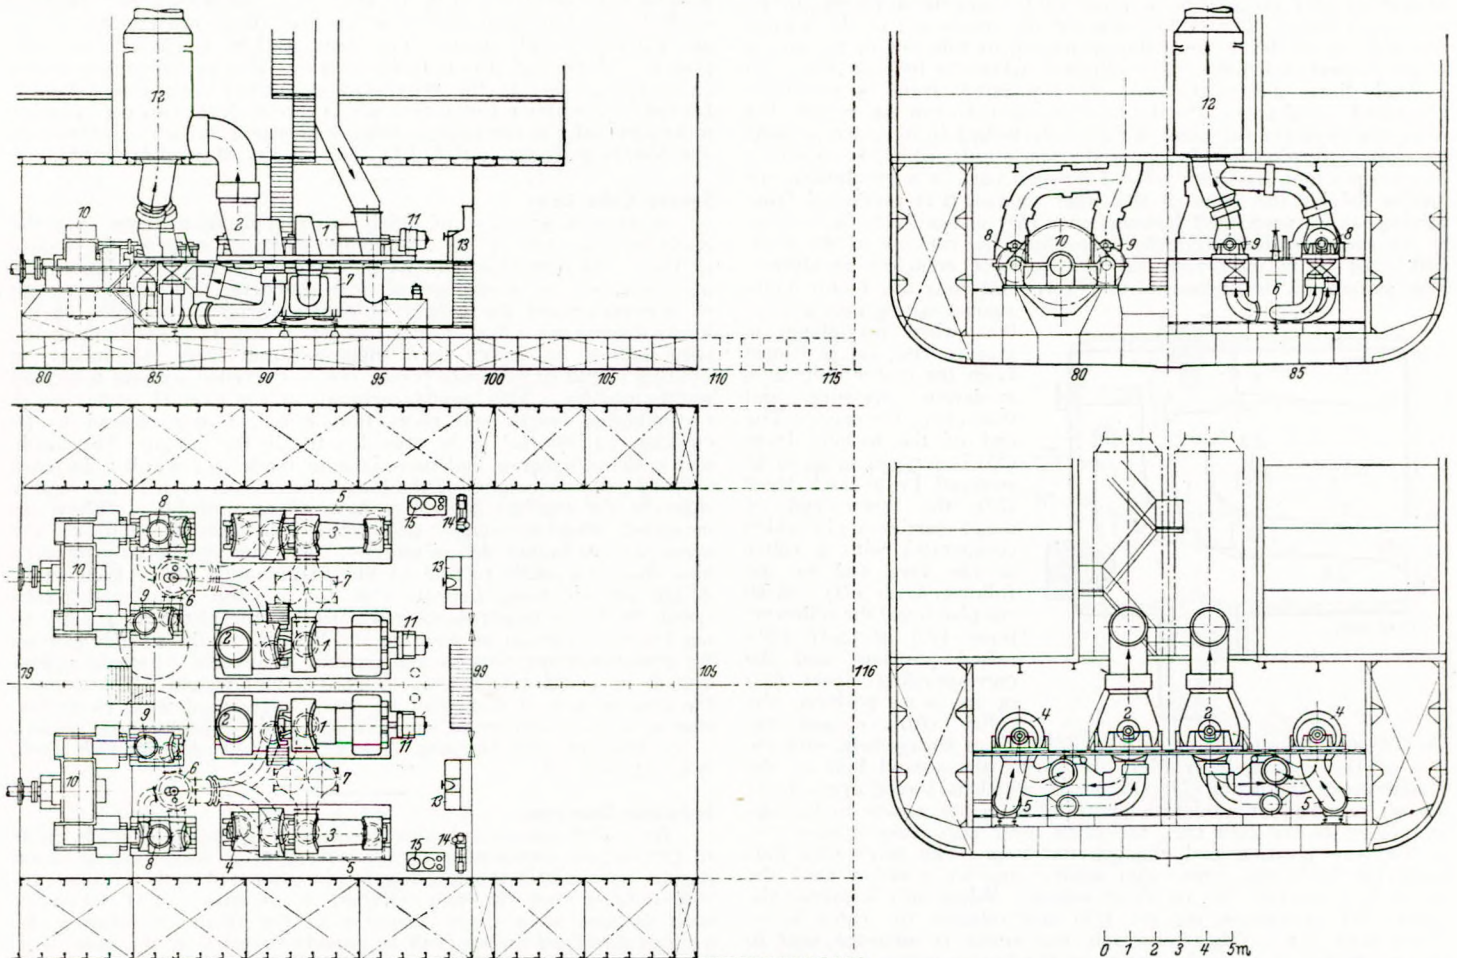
Engine-room arrangement of combustion turbine installation with two-stage compression and combustion. Two 7,100-b.h.p. units. Propeller speed 125 r.p.m. 1.—L.P. compressor. 2.—Turbine driving L.P. compressor. 3.—H.P. compressor. 4.—Turbine driving H.P. compressor. 5.—H.P. combustion chamber. 6.—L.P. combustion chamber. 7.—Air cooler. 8.—Propelling turbine with astern turbine incorporated. 9.—Propelling turbine. 10.—Reduction gear. 11.—Starting motor. 12.—Exhaust-gas boiler. 13.—Control platforms and switchboard. 14.—Fuel pump. 15.—Fuel heater. Distance between frames 109 and 116 represents saving in space compared with a steam-turbine installation. Space between frames 99 and 109 reserved for auxiliary machinery.
